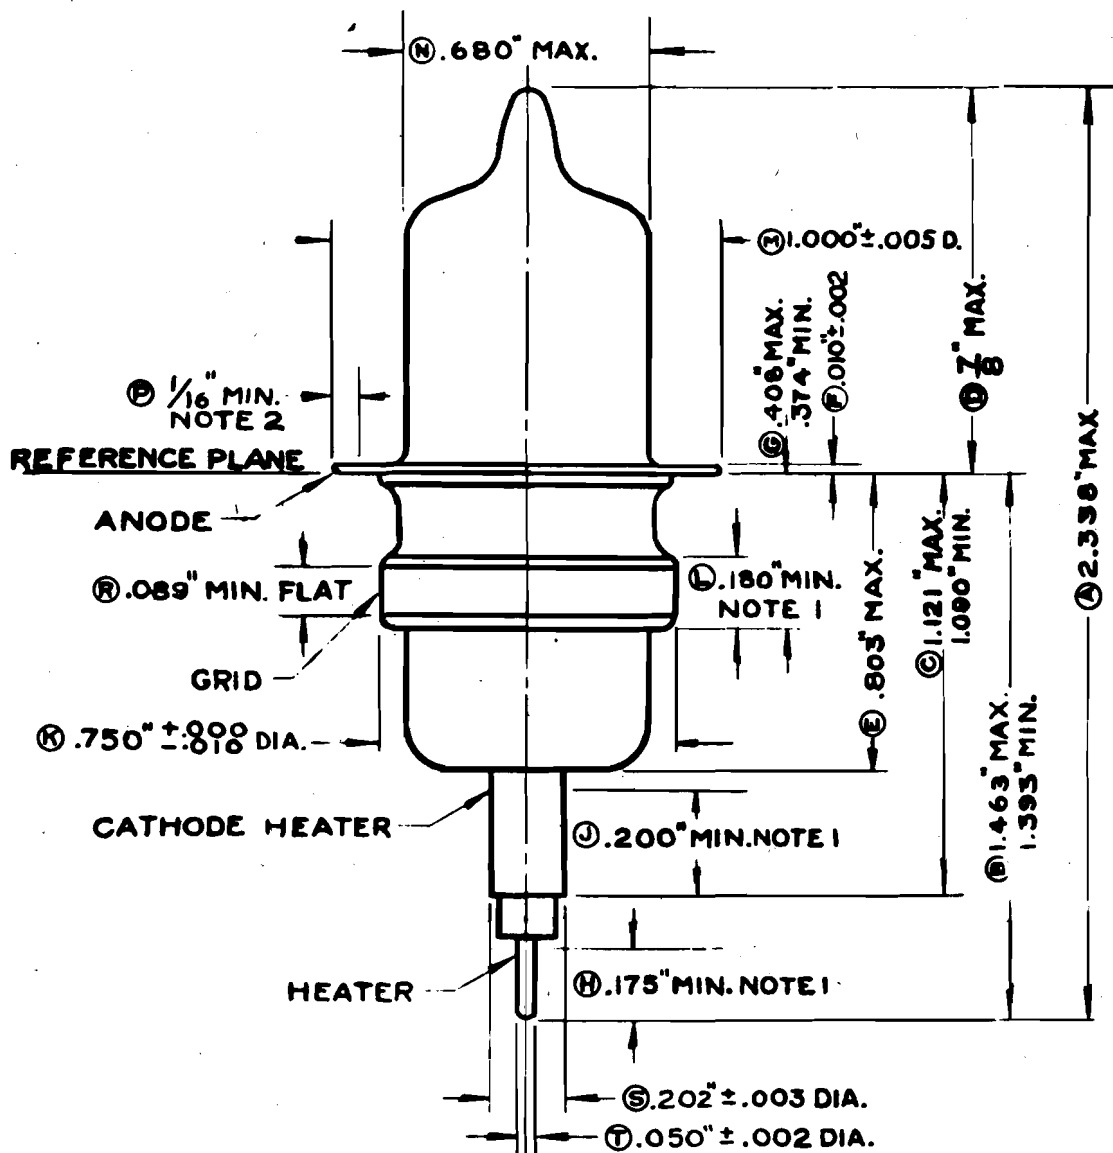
Outline drawing showing the dimensions that are necessary for designing cavities. The dimensions are the same for each of the three tube types - 2C36, 2C37 and SB-846B
